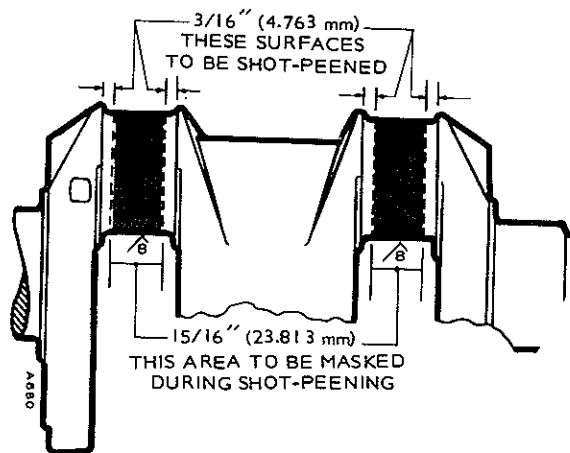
SHOT-PEENING DIESEL CRANKSHAFTS
